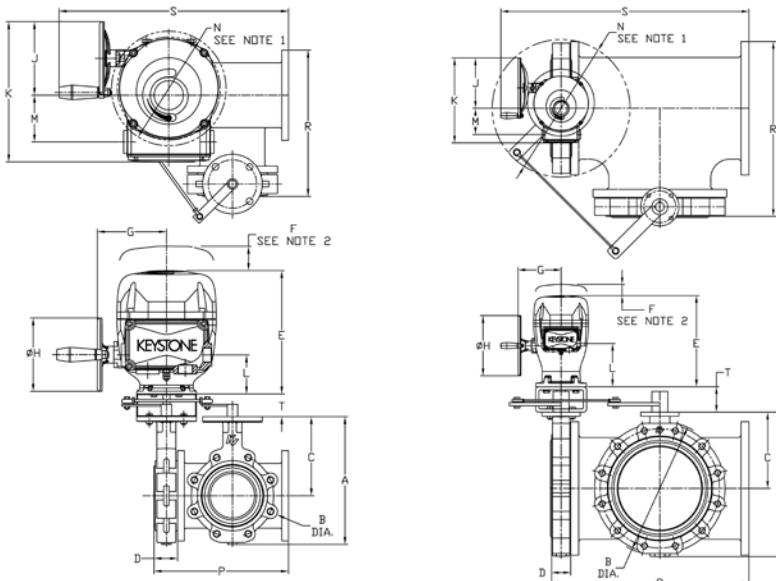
Three-Way EPI₂ Electronic Actuator Valve Assemblies
